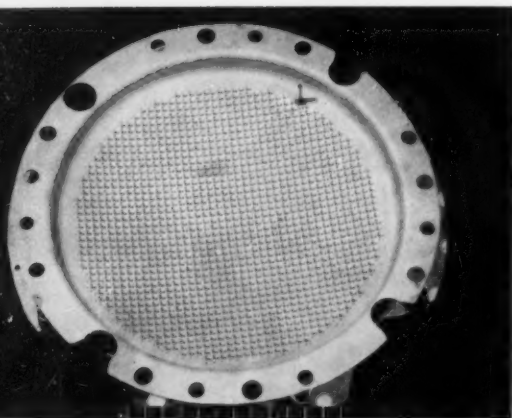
Furnace-Brazed Injector Head, Made of AM 350 and Nickel Alloy Parts, Will Be Mounted in Rocket Thrust Chamber. (Solar Aircraft Co.)
